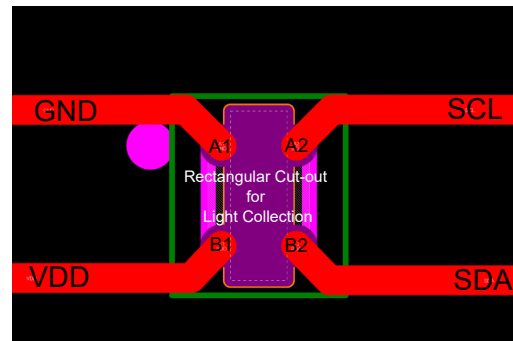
Layout Example With a Rectangular Shaped Cut Out
